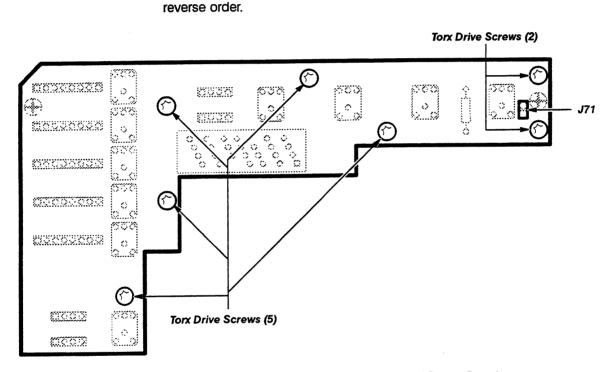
Removing/Replacing the A11 Front Panel Button Board
